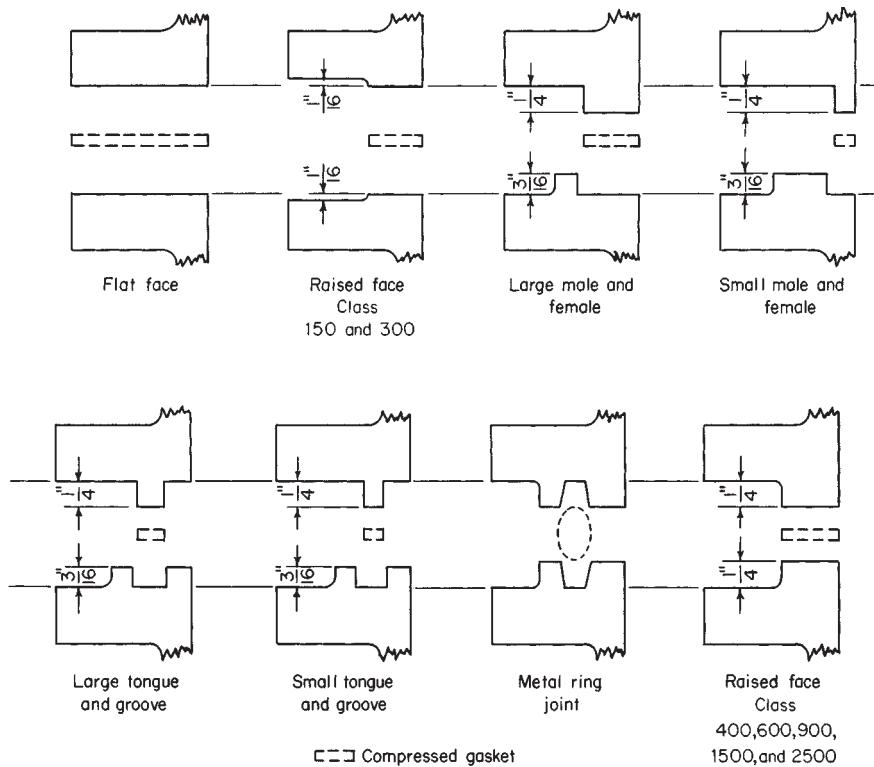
Flange facings, illustrated on welding-neck flanges. (On small male-and-female facings the outside diameter of the male face is less than the outside diameter of the pipe, so this facing does not apply to screwed or slip-on flanges. A similar joint can be made with screwed flanges and threaded pipe by projecting the pipe through one flange and recessing it in the other. However, pipe thicker than Schedule 40 is required to avoid crushing gaskets.) To convert inches to millimeters, multiply by 25.4.
